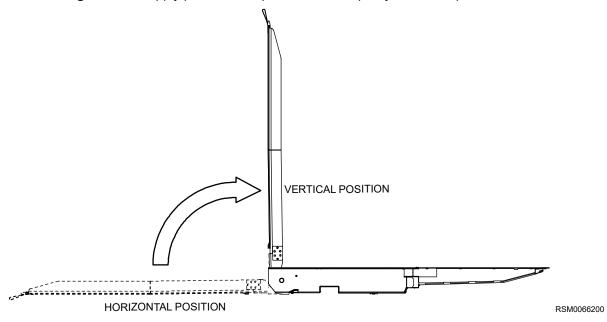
RAMP TRAY ROTATED TO VERTICAL POSITION
